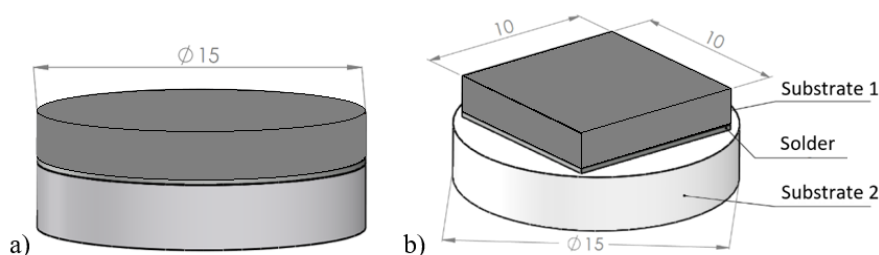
Solder joint assembly (a) for solder/substrate interface analysis, (b) for shear strength measurement.
